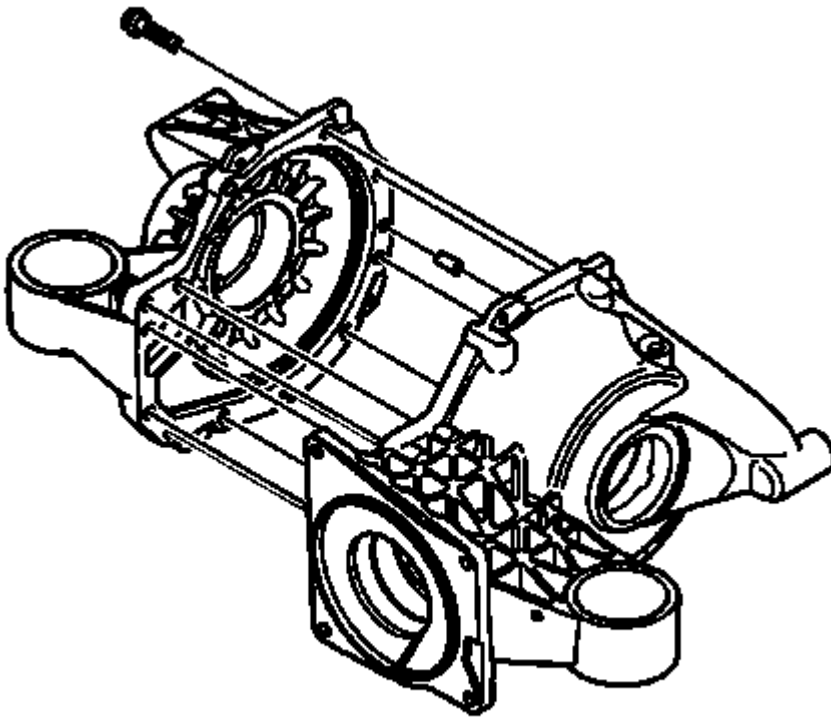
Identifying Differential Carrier Assembly Housing & Bolts
